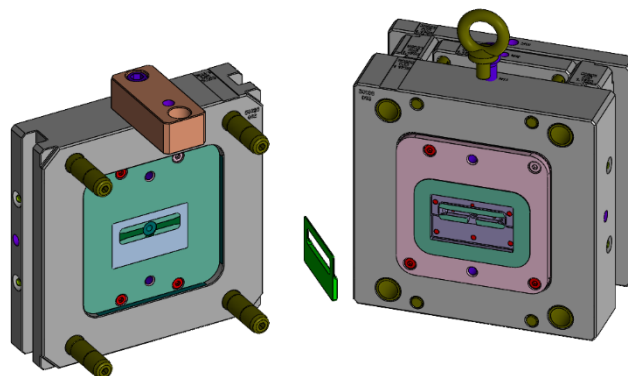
Final injection mould CAD model: Injection side (left); Part (middle); Ejection side (right).
